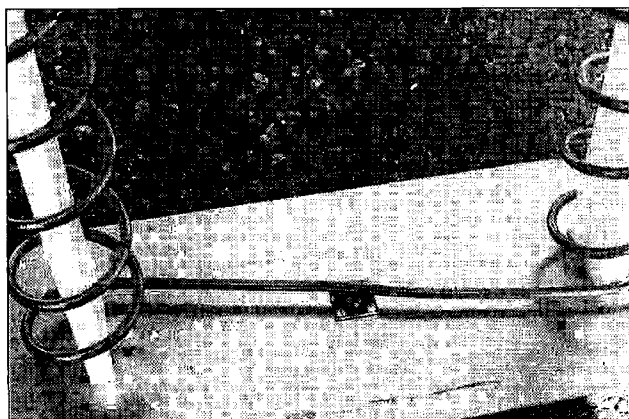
Photo C. The crossover should nearly meet the chassis connector, and they should be carefully and securely soldered together at that point.
